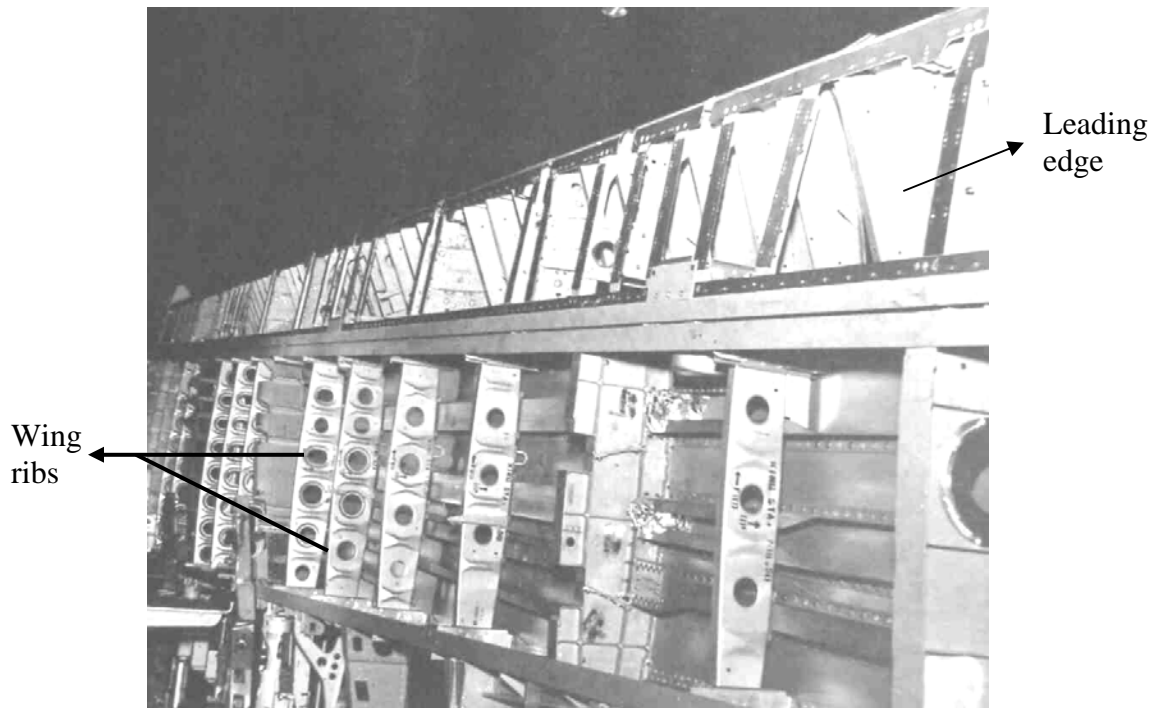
727 aircraft wing with lower skin not installed showing the wing ribs [3]
